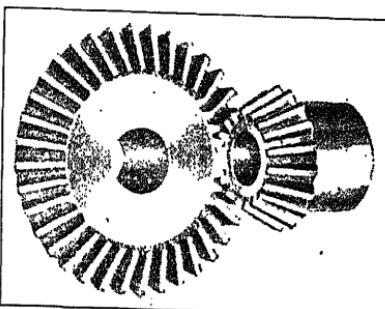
Bevel gears. Boston Gear Works, Boston.
